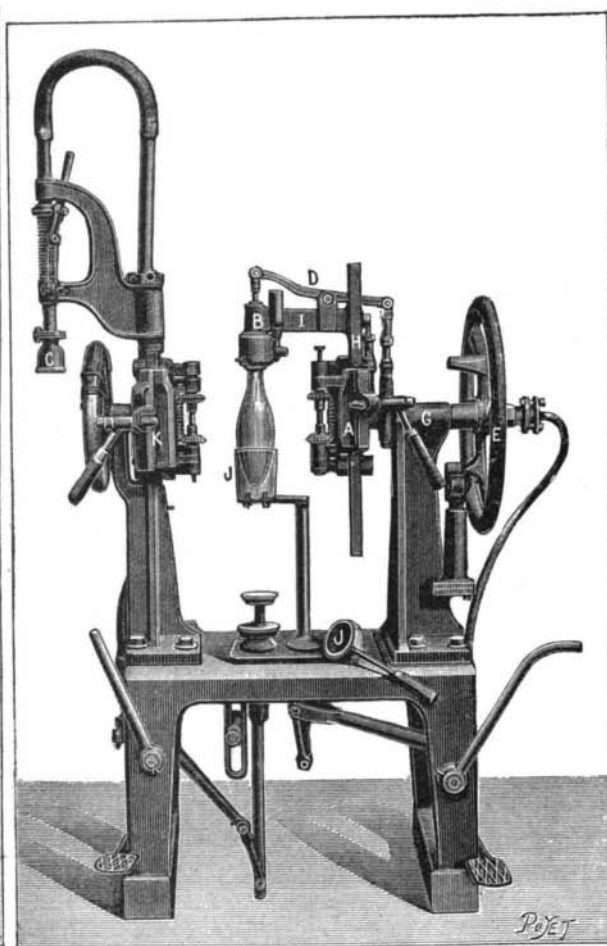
BOUCHER BOTTLE MACHINE AS IT APPEARS IN OPERATION.
